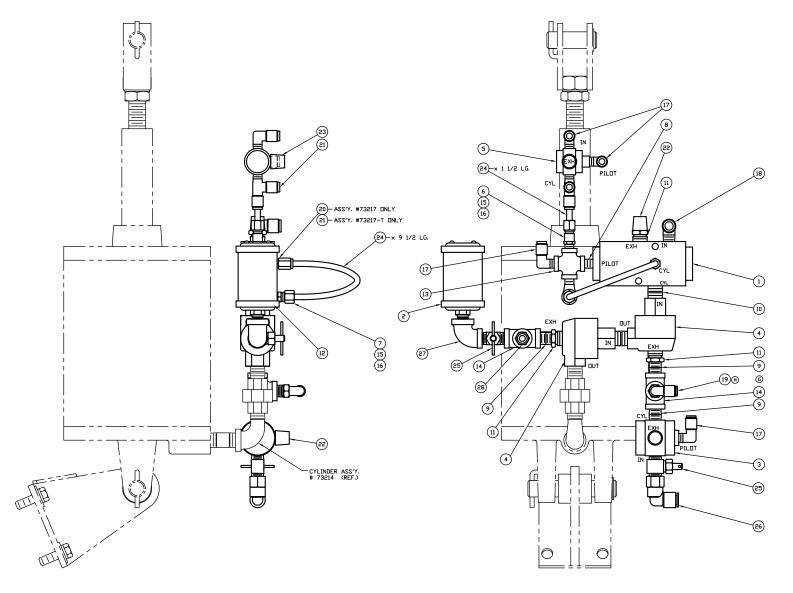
73219 (Rev. K) Cylinder Circuit Assembly W/Head Hesitation (2) Button Close For drawing refer to next page.
